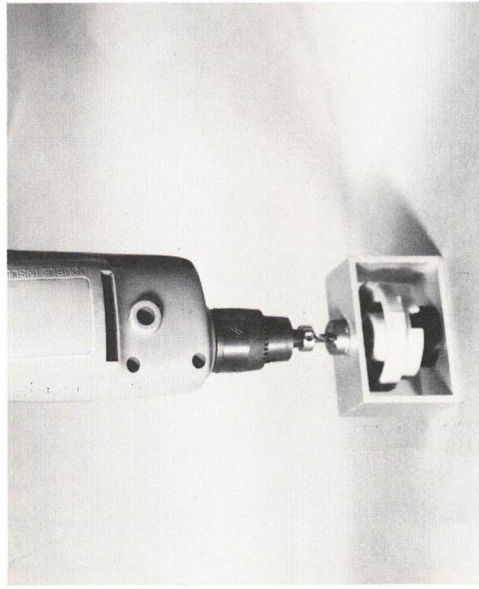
Alignment Fixture in Use with Portable Electric Drill
